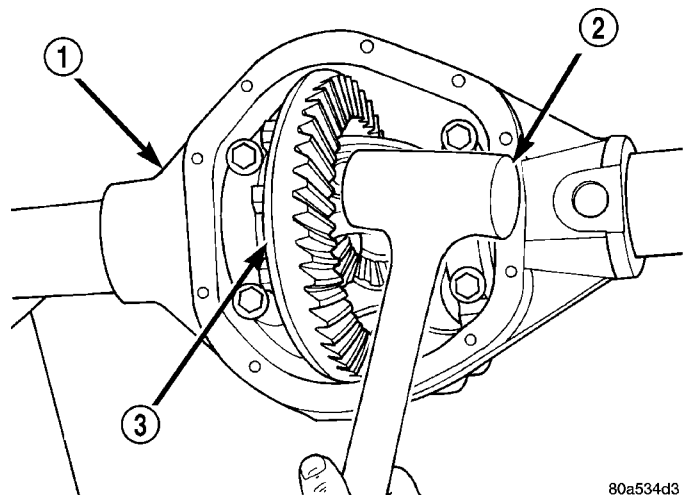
SEAT DUMMY BEARING RING GEAR SIDE
